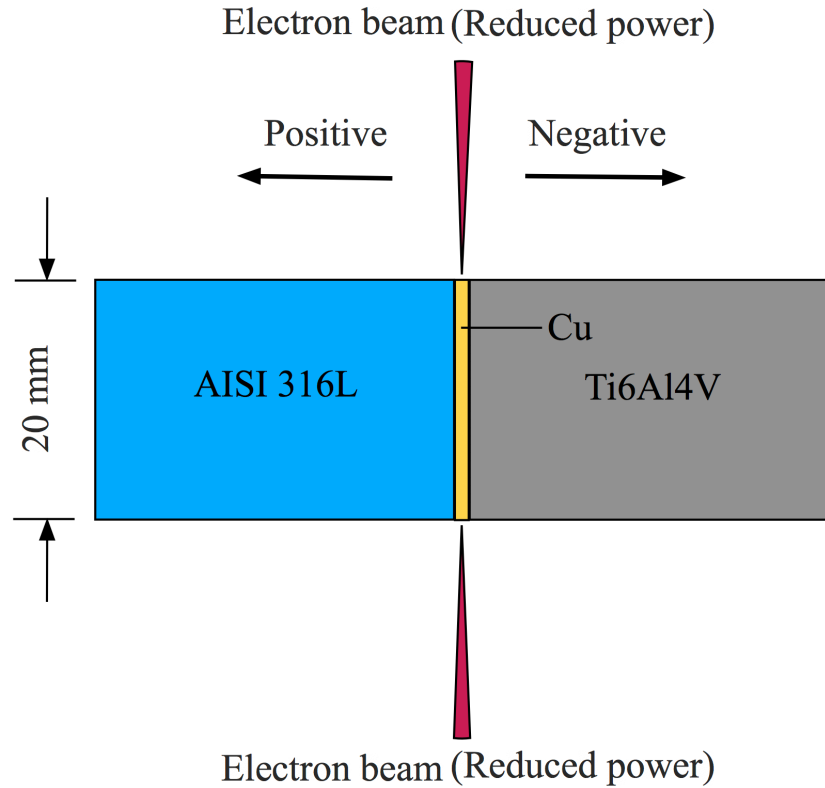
A schematic representation of the Ti6Al4V – Cu – AISI 316L weld.
